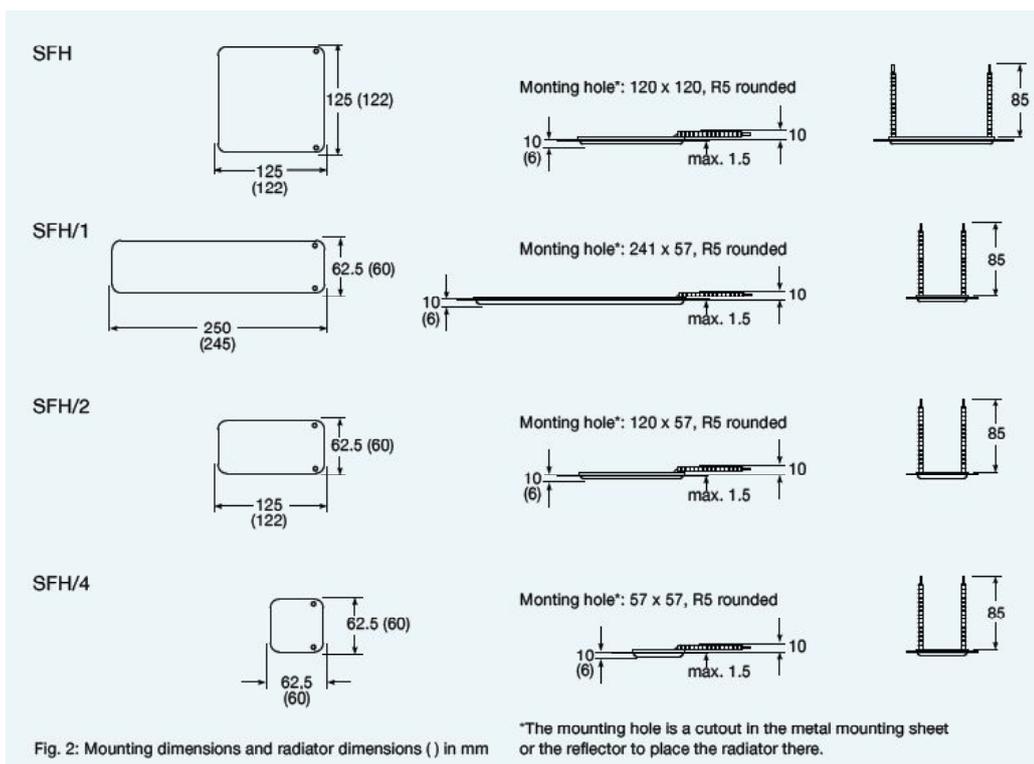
Mounting dimensions and radiator dimensions ( ) in mm
